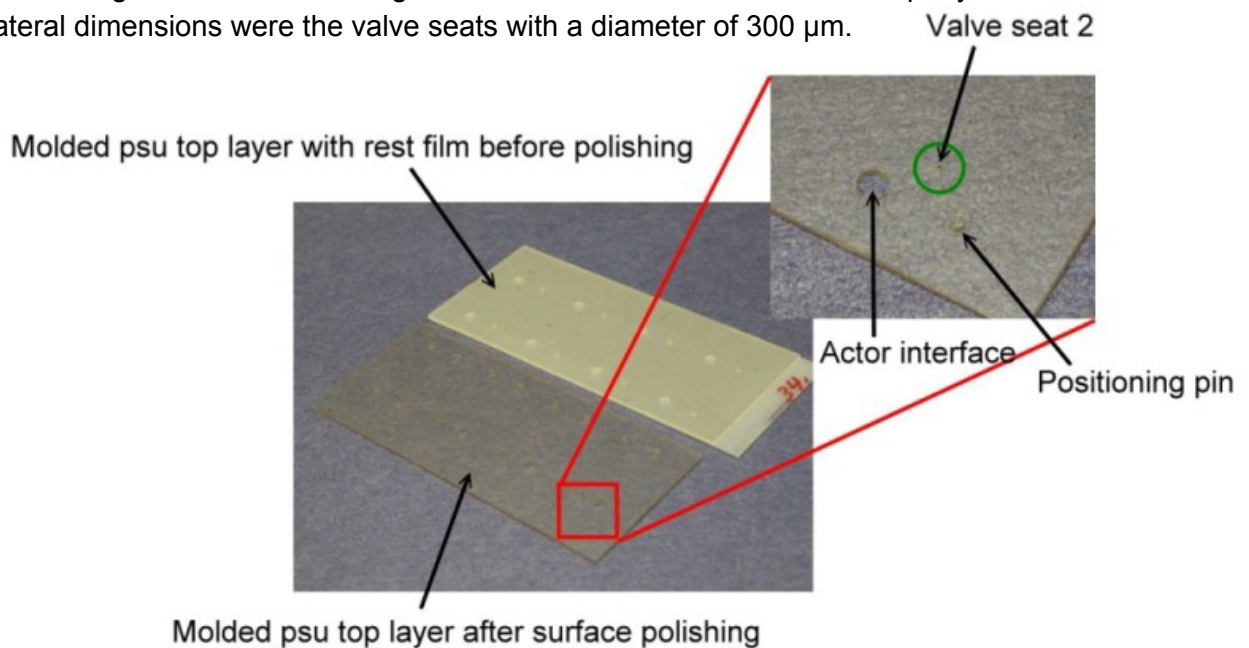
Molded PSU top layers with a thickness of 0.5mm (after the molding process). The picture shows one before surface polishing and one after.
